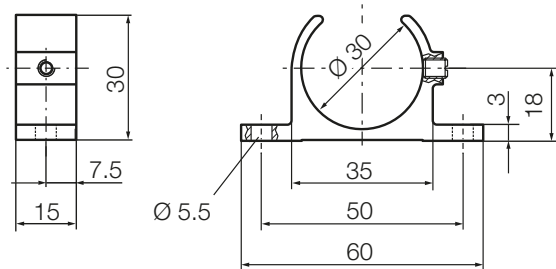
Mounting bracket BTL6-A-MF01-A-50
